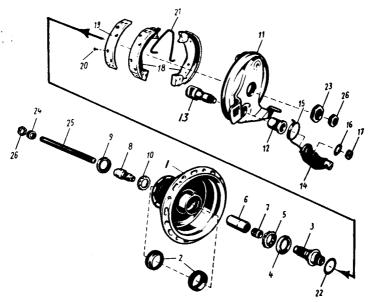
Front Hub Assembly (Models Subsequent to 482 755/522 990)
